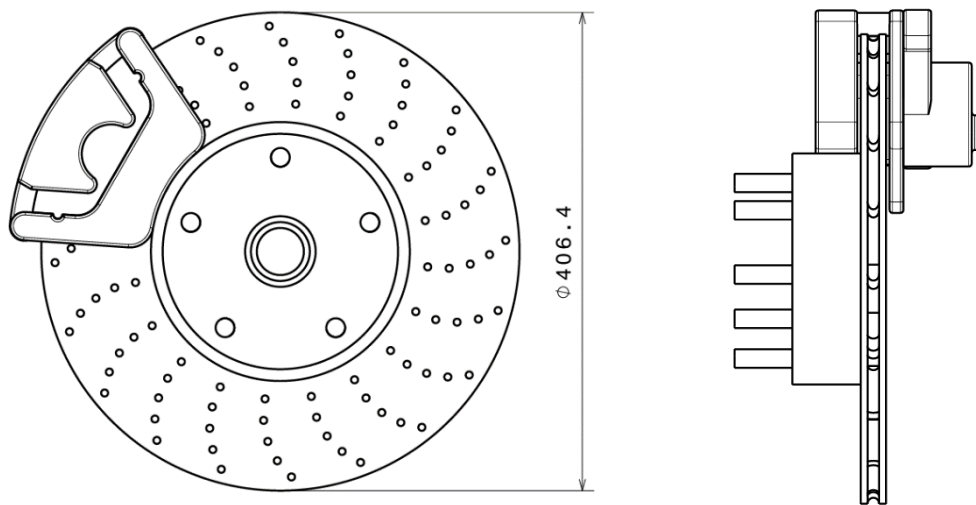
Orthogonal views of the brake disc and caliper used in the conventional wheel-end configuration
